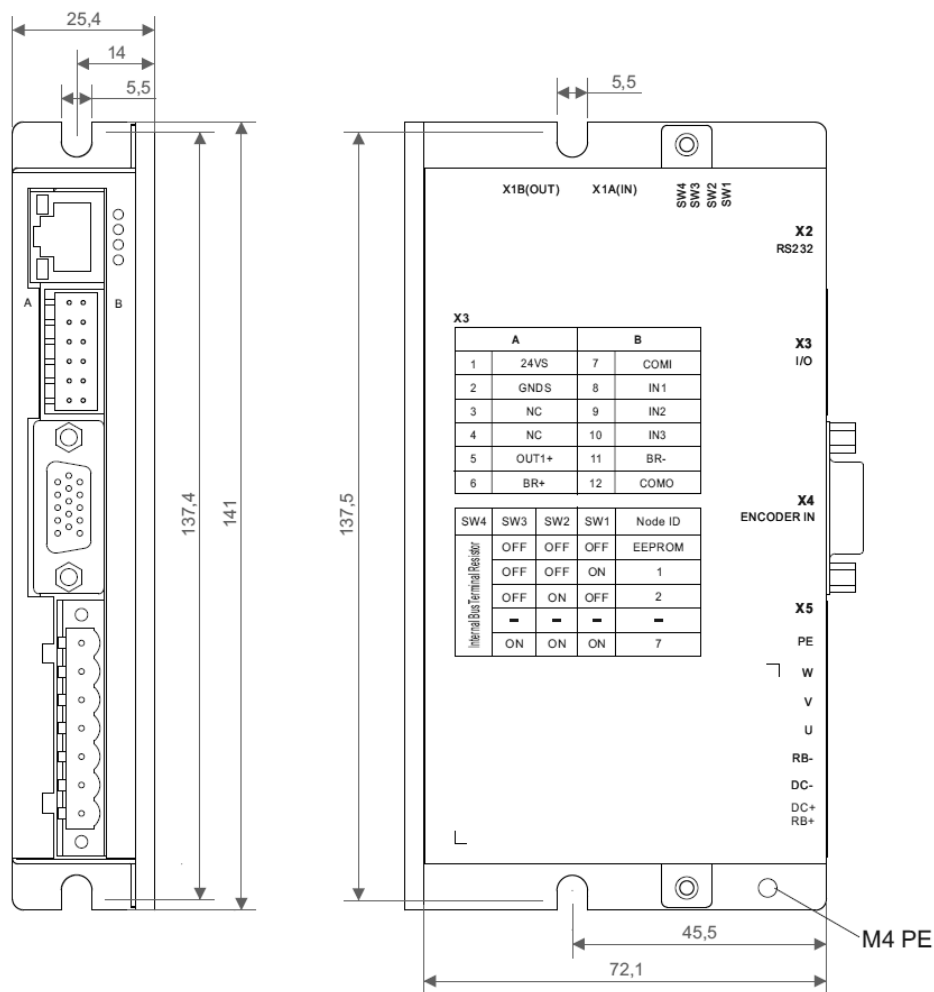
Dimensions in mm (front and side, E°Darc S05/12)
